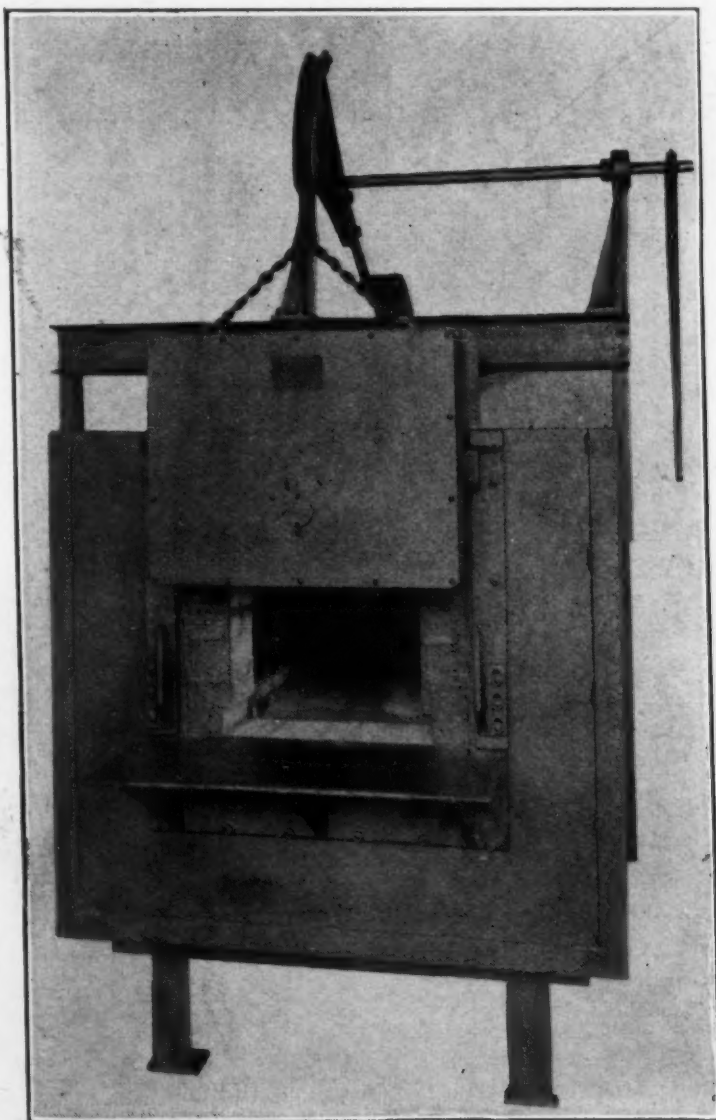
Box Type Electric Resistance Furnace. Inside Dimensions 18" wide, 36" long and 15" high. 27 KW, 110-220 Volts.
